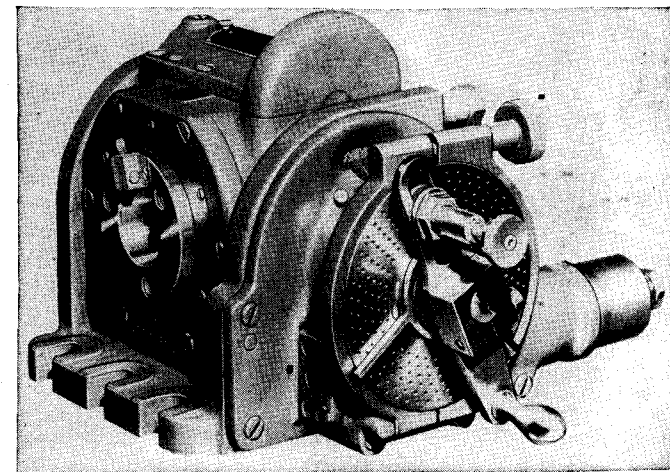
The Kearney and Trecker (Milwaukee) Model K universal spiral dividing head, 5 to 1 ratio. (The Kearney and Trecker Corporation)
